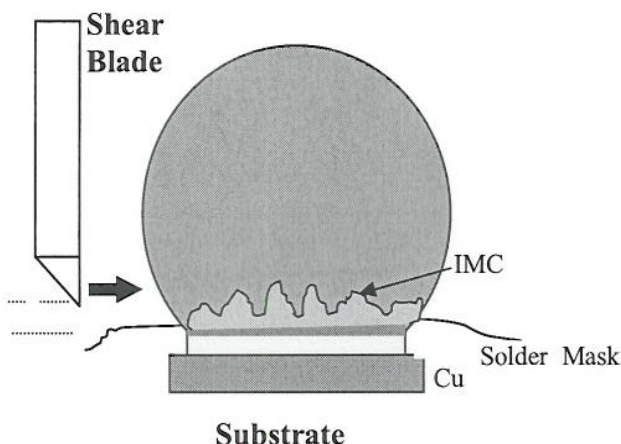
Schematic diagram of the shear test configuration for a BGA solder joint.
